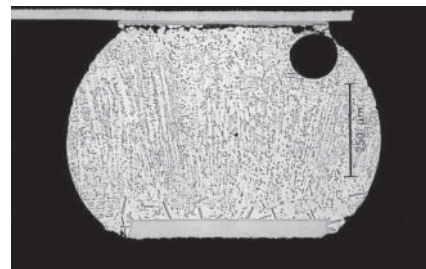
Metallographic cross-section of a lead-free SnAgCu solder joint showing fracture in the solder adjacent to the interface with the component following accelerated thermal cycling. Failure location is the same as for Sn-Pb eutectic solder, which this alloy is replacing as a standard alloy.
